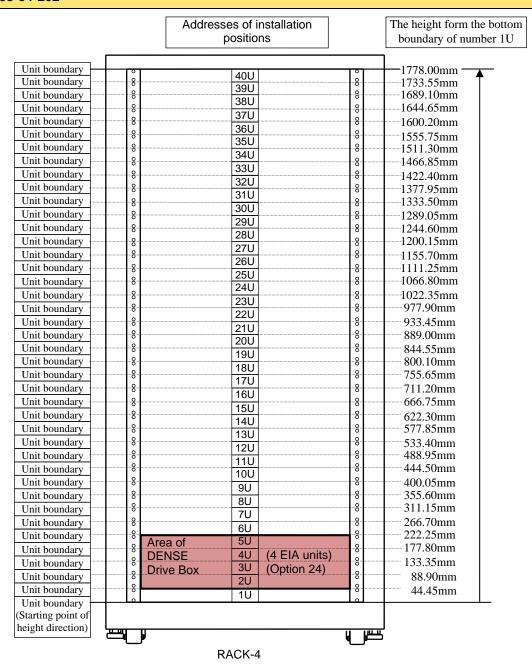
Whole Layout of Installation Position Addresses (RACK-4)
